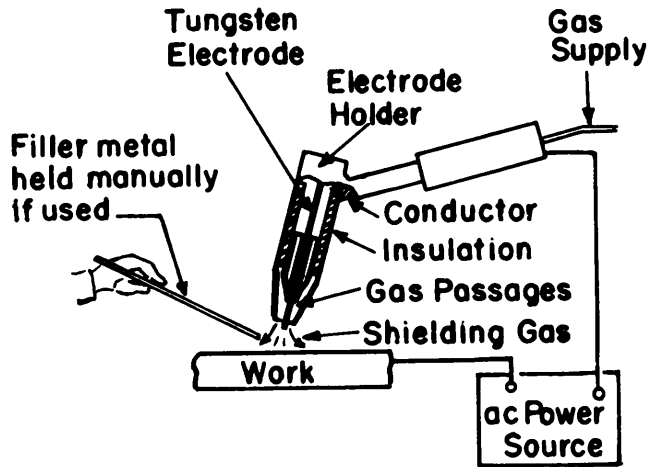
Schematic Diagram of Equipment For Inert Gas Tungsten Arc Welding
